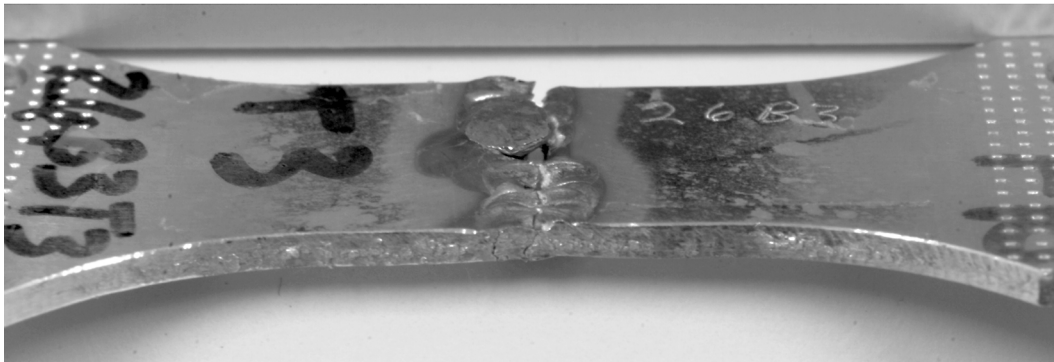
shows a butt weld joint on Al 2219. This fracture revealed many large pores and some lack of fusion with some good ductility on the fracture surface.
